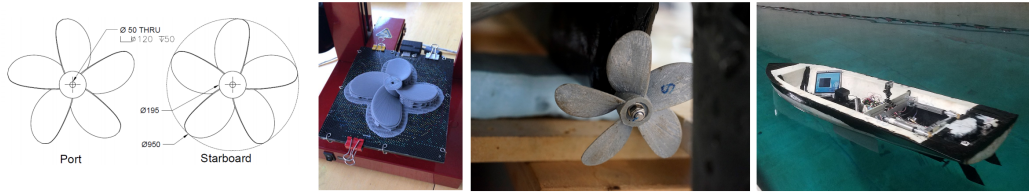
3D printed propeller (design, manufacture, assembly, testing)
